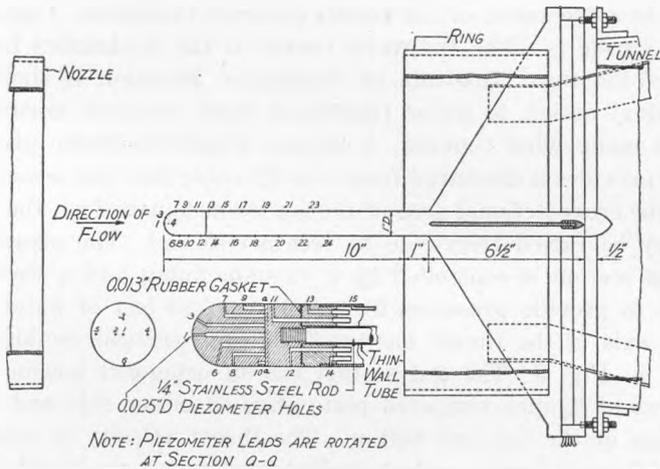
DETAILS OF SHAFT, MOUNTING, AND TYPICAL HEAD.
